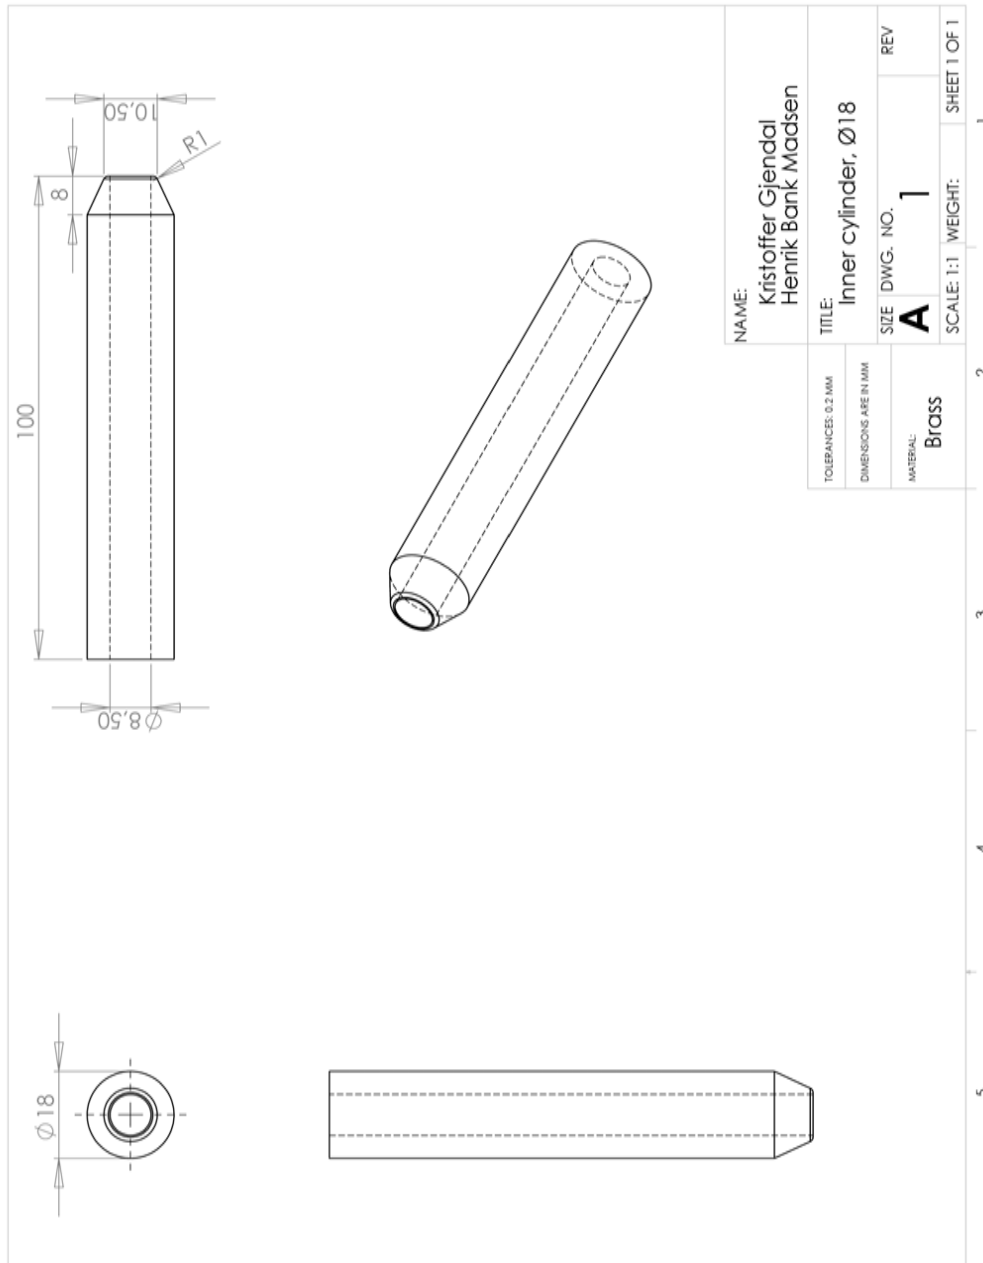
Thick inner cylinder made out of brass used to make the thin-walled monotubes.
